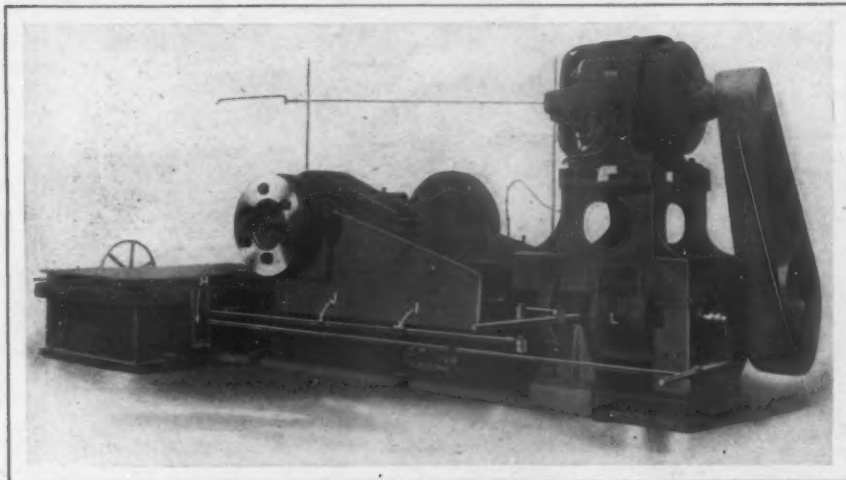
The Driving Side of the Machine Showing the Feed Control Mechanism
